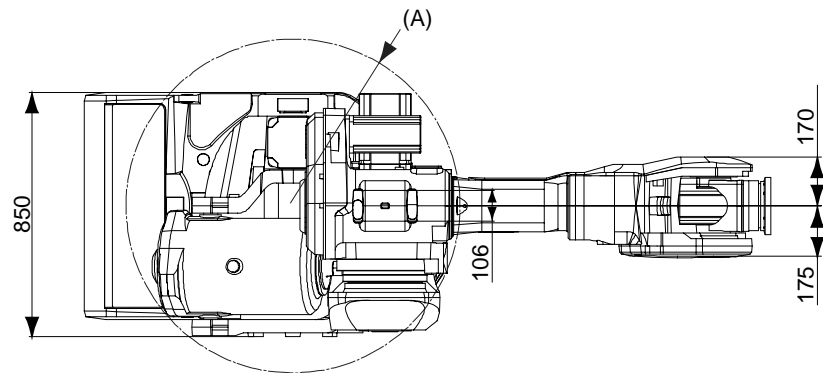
Holes for mounting of extra load on the upper arm on IRB 6600/6650 (dimensions in mm).
